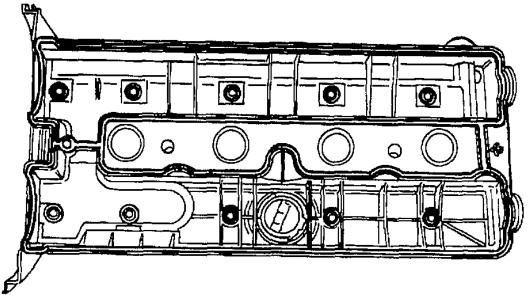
Removing The Camshaft Cover Bolts Courtesy of SUZUKI OF AMERICA CORP.
